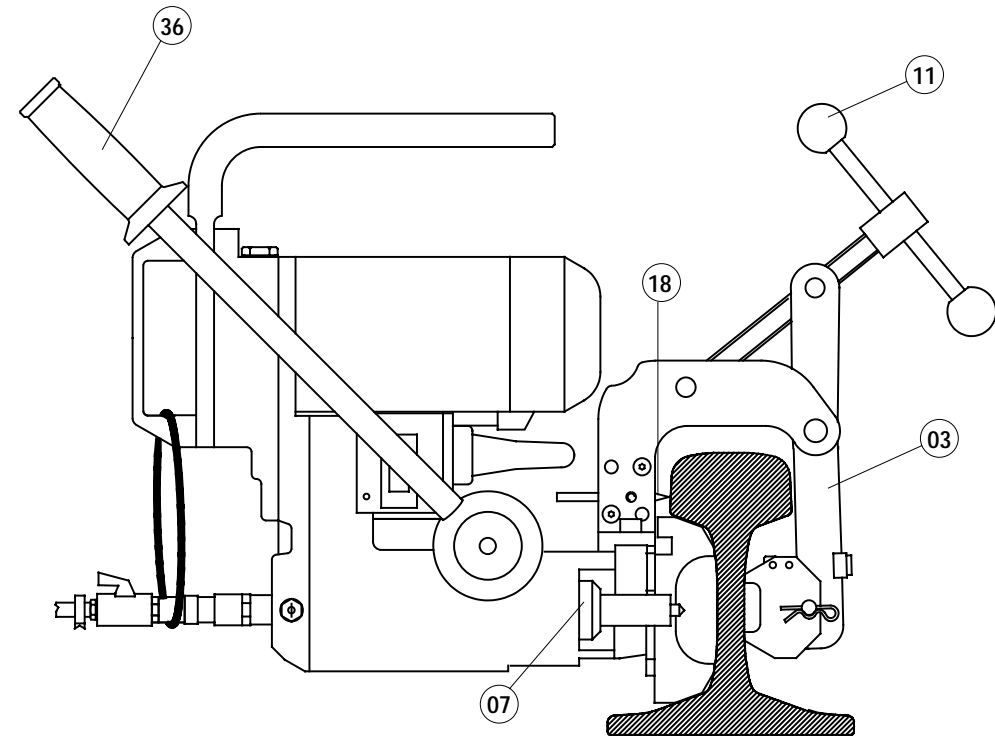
ASSEMBLY OF THE POSITIONING SHOES
